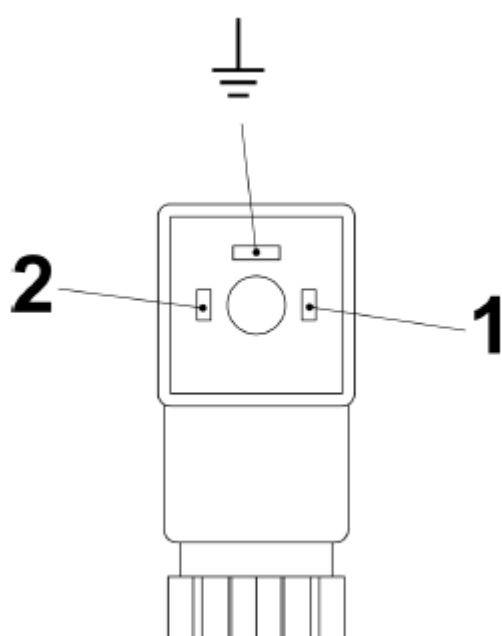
Pin assignment, plug socket, normally open contact (Form 15x50)
